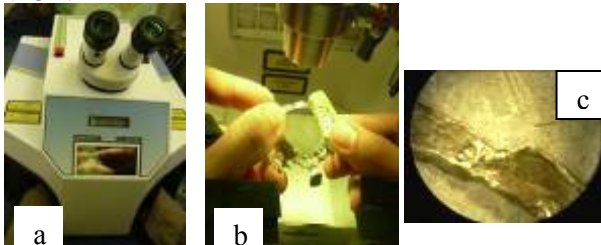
Welding in Dental laboratory: a. Welding equipment; b. welding a removable partial denture major connector; c. welded area aspect.
